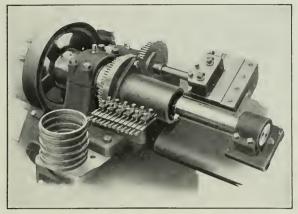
Boring, Turning, and Cutting Off Piston Rings
